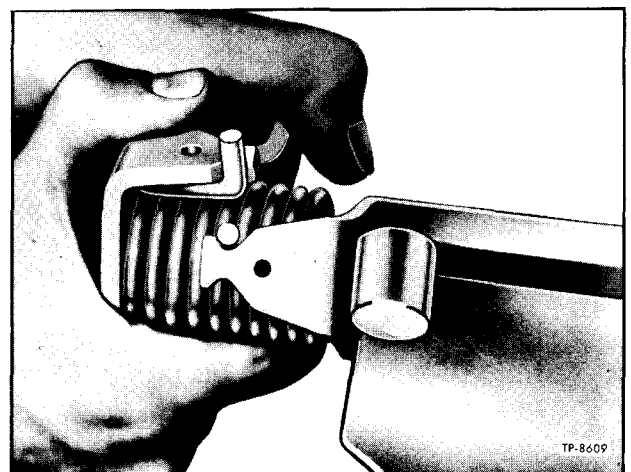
Assembling Torsion Spring and Levers (Eaton)
